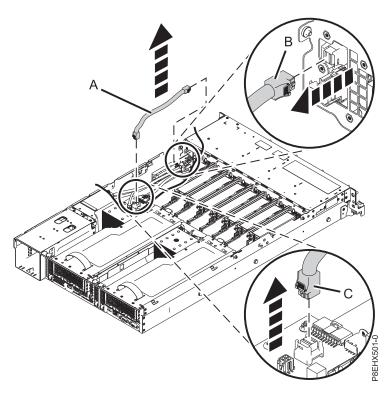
Removing the disk and fan signal cable from the system backplane and the disk drive and fan card
